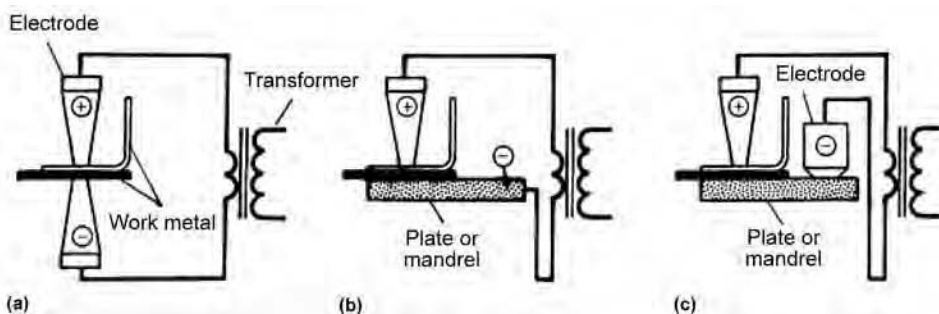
Direct spot welding of single welds. (a) Electrodes directly above and below the weld zone. (b, c) Direct weld with conduction through a platen
